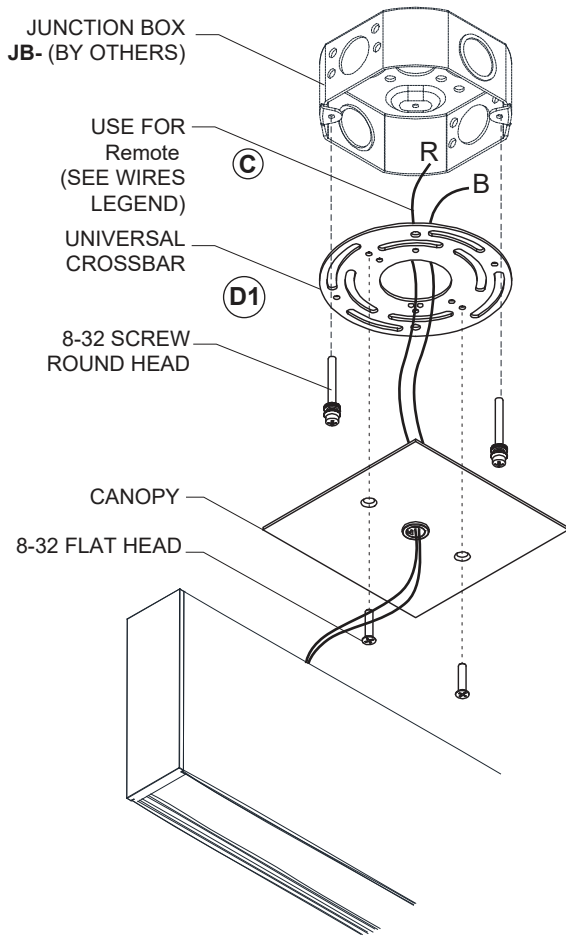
CANOPY INSTALLATION AND ELECTRICAL
